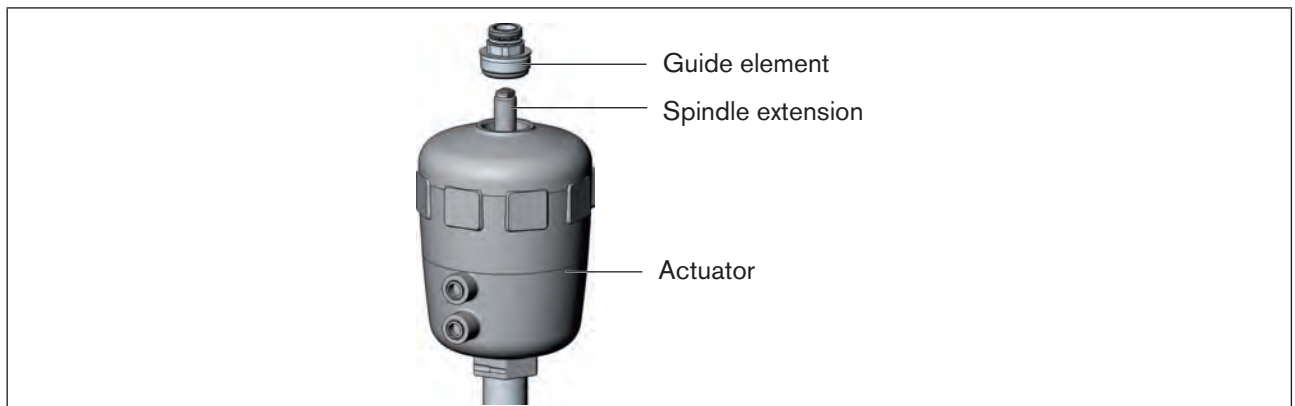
Installing the switch spindle (1), series 26xx and 27xx
